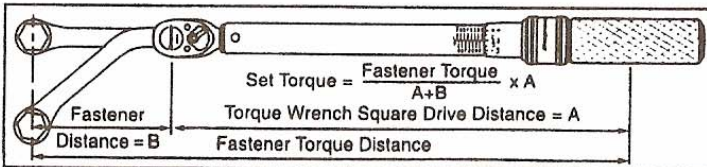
Fastener torque is greater than torque wrench square drive torque.
